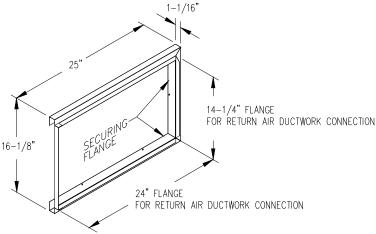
A typical filter rack and dimensions for the CSHB60-90 furnace.
